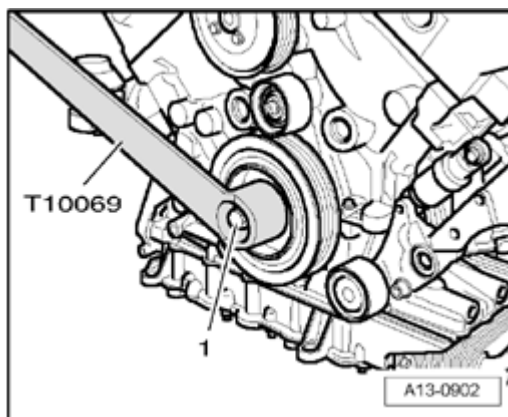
Counter-Holding Crankshaft Using Counter-Holder T10069 Placed On Vibration Damper
